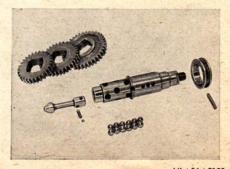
Gear shaft, gear wheels, sleeve and draw key stripped from the gearbox (up to engine No. 01 000 014)
